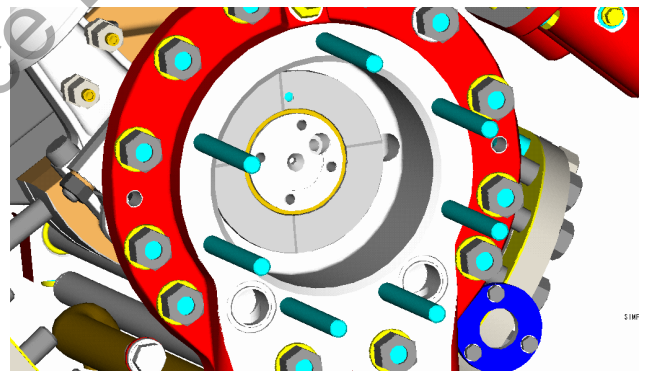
Old version of thrust bearing (Refer also to Section 2.10, Page 22)
